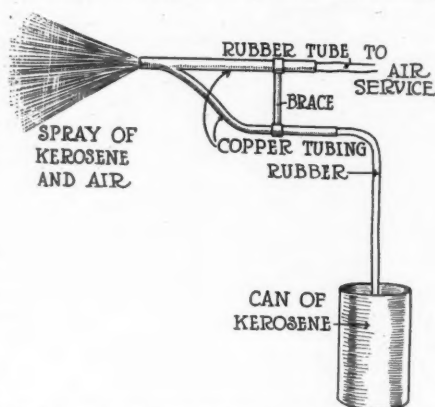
A SIMPLE DEVICE FOR CLEANING
